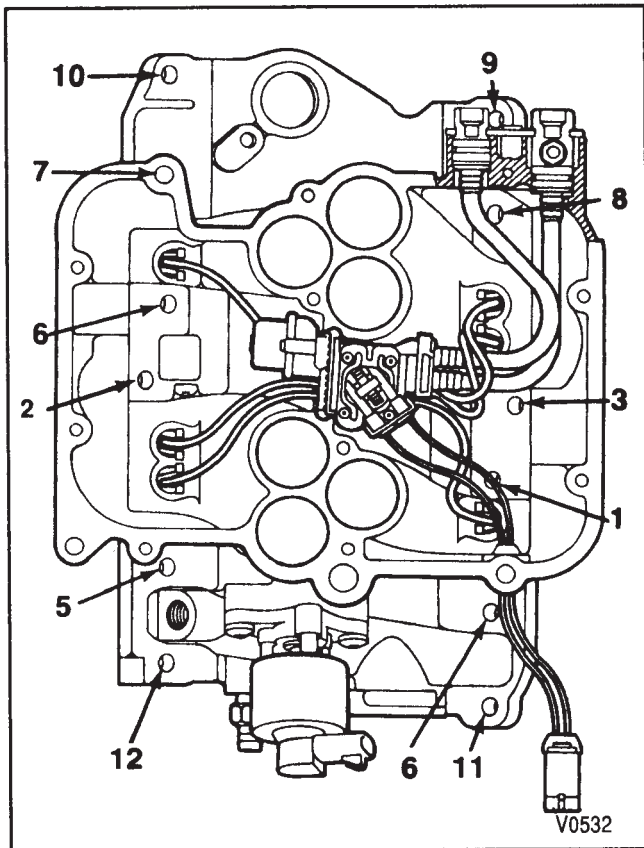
Lower Intake Manifold Bolt Tightening Sequence (VIN W Engine)
